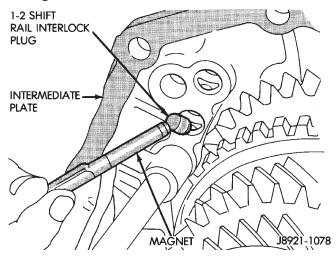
Remove 1–2 Shift Rail Interlock Plug
